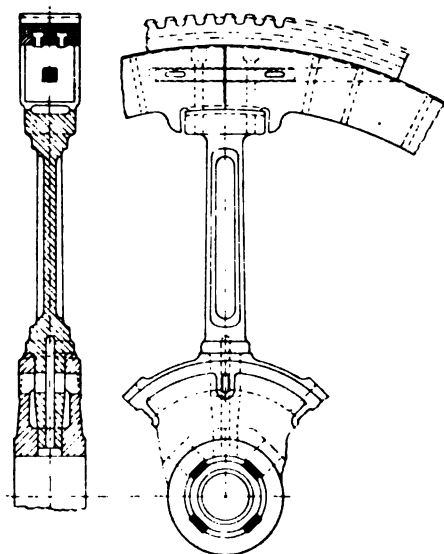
Fly-wheel, with spur-segments mounted on fly-rim.
